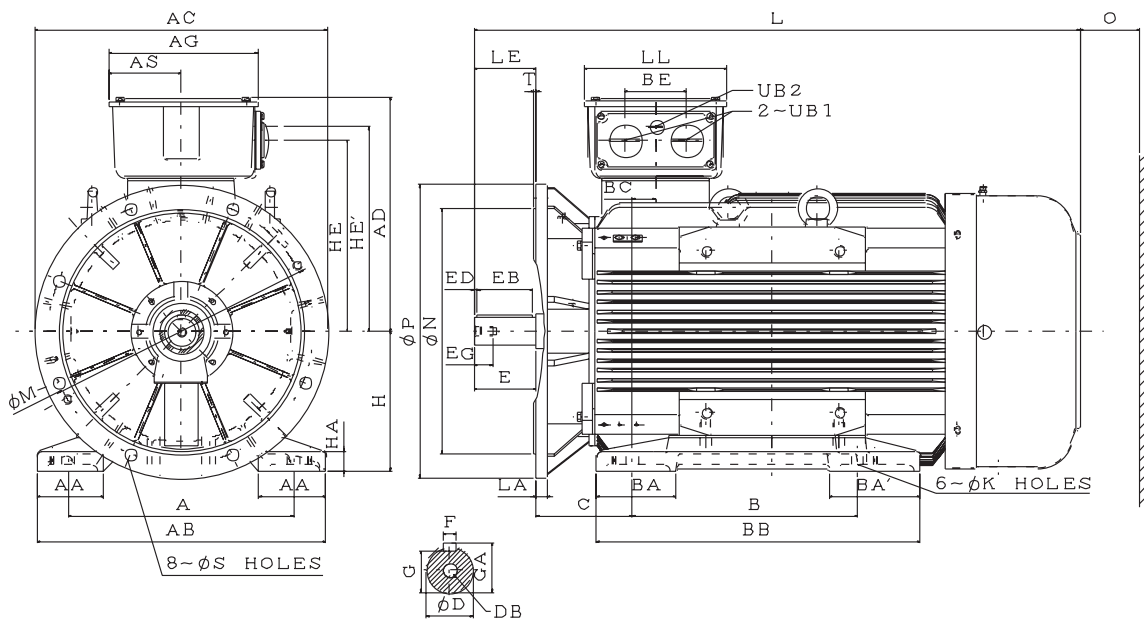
Outline drawing of cast iron design, feet version, mounting B35; frame size 315LA - 315LC
